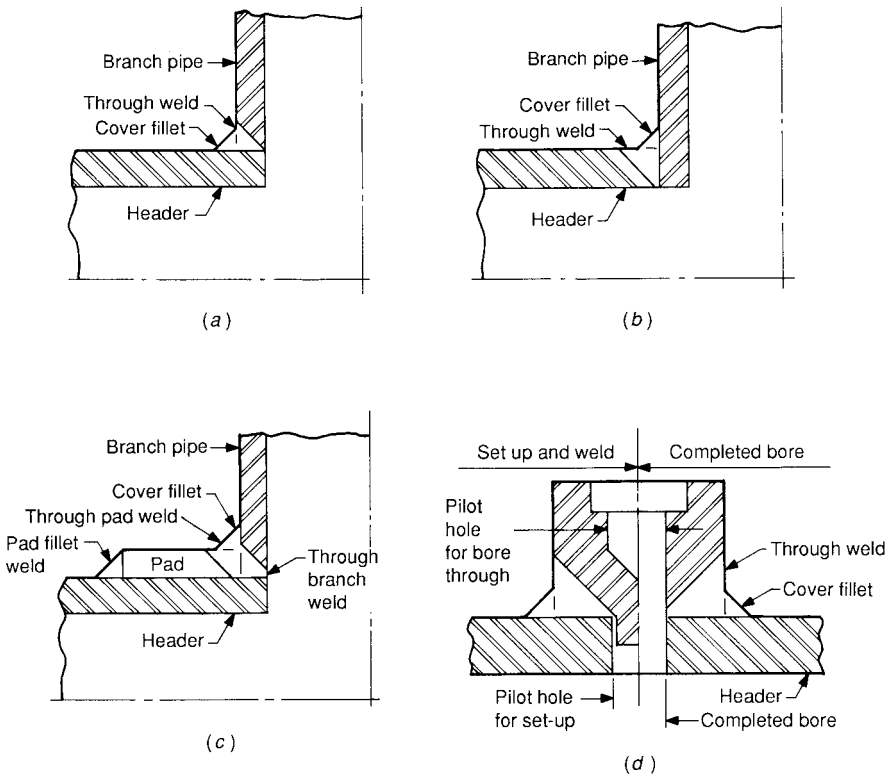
Types of branch nozzle construction. (a) Set-on; (b) set-through; (c) set-on with reinforcing pad; (d) special drill through socket weld coupling.
